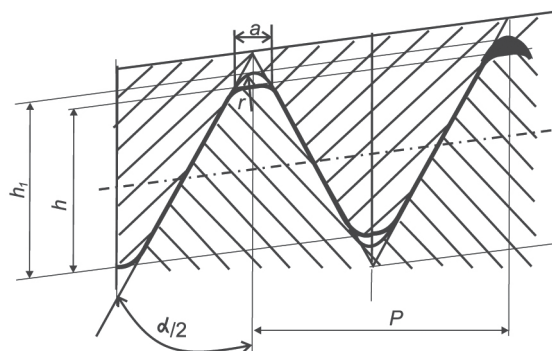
Scheme of tool joint tapered thread according to API 7 standard
